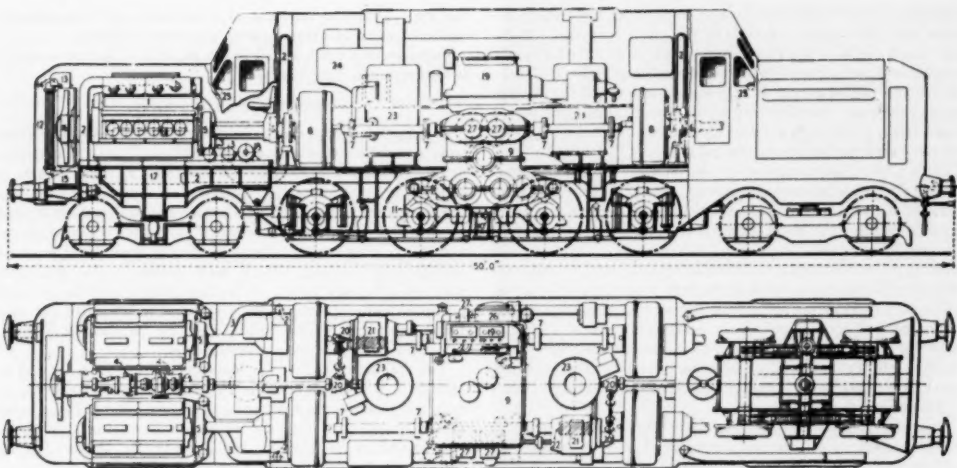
EQUIPMENT LAYOUT OF LOCOMOTIVE SHOWN IN FIG. 24
